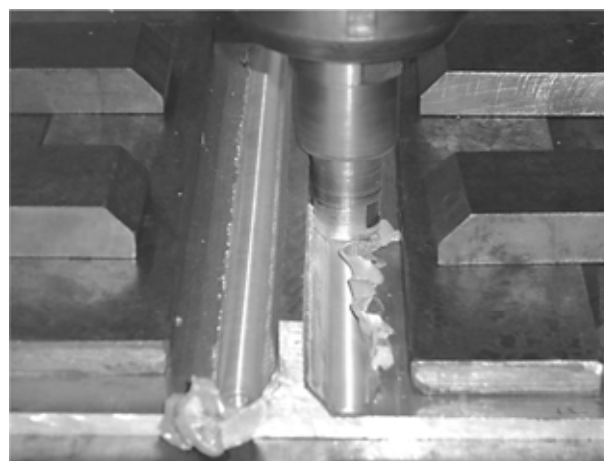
FS processing of the MIG T-fillet welds.
